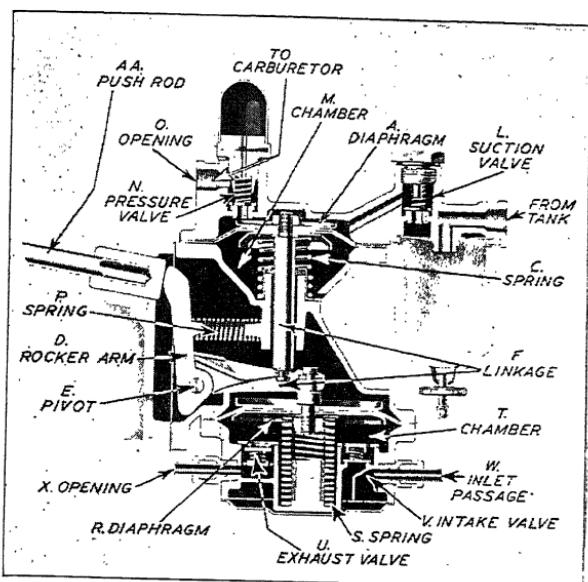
Combination Fuel and Windshield Wiper Vacuum Pump
